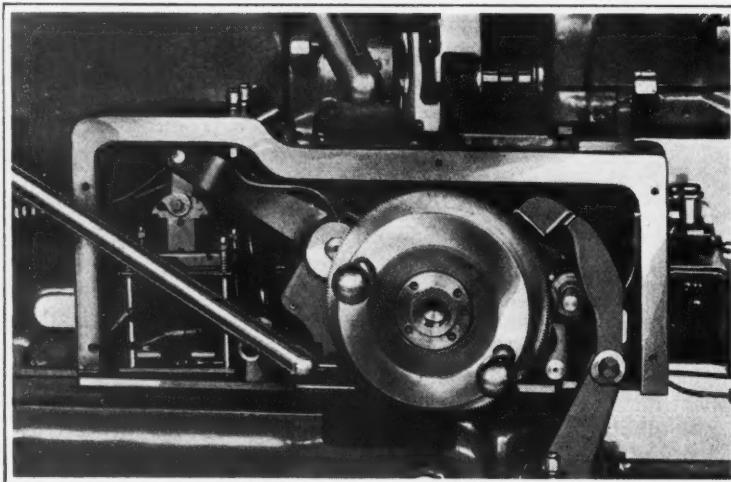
Electrical Mechanism which Disengages Feed and Backs away Wheel when Correct Work Size is Obtained
